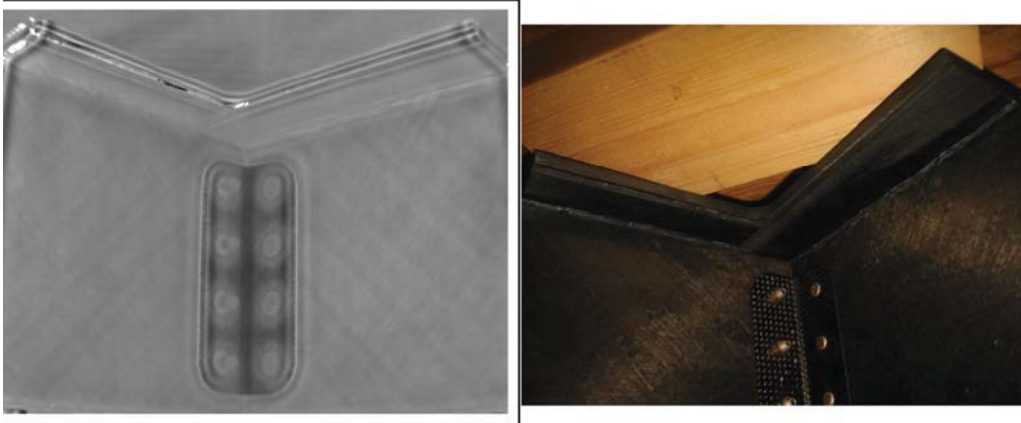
Thermal inspection results for cruciform 2, rivet 2 top.
